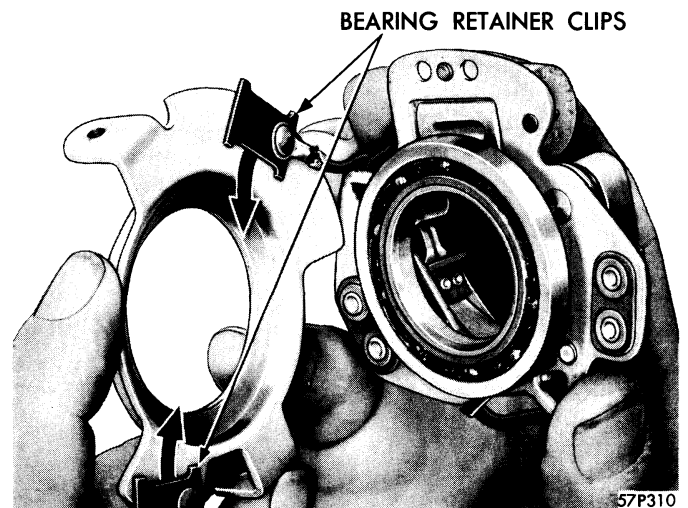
Releasing Distributor Breaker Plate Bearing (Dual Breaker Point Distributor Only)
